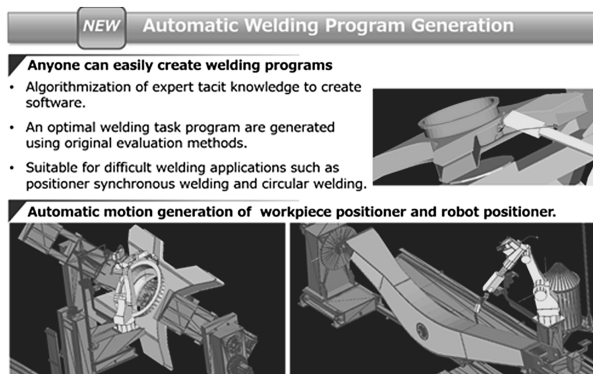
Automatic generation of welding programs for large and complex workpiece shapes
